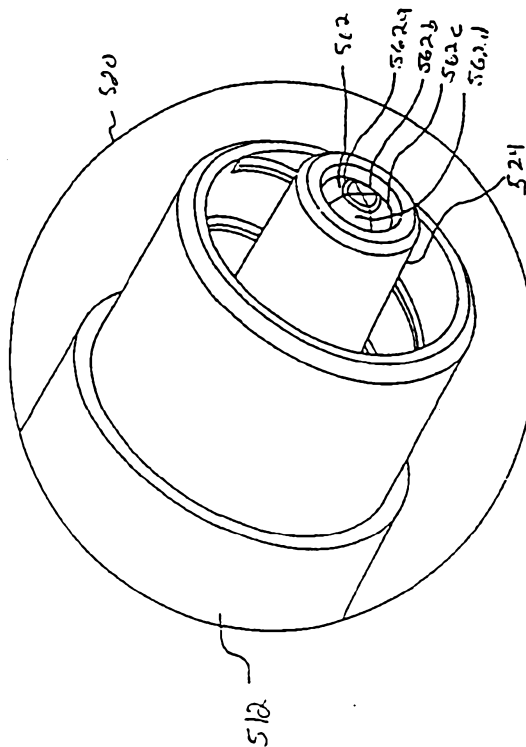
L ISO VIEW - PRE-ENGAGEMENT POSITION
